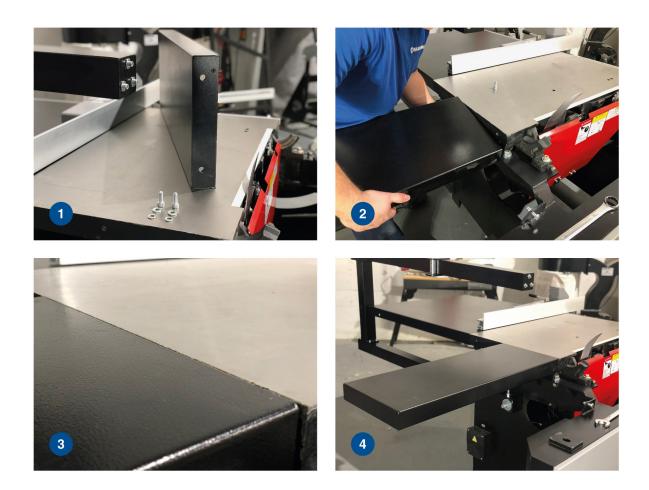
, 2 and 3: Align side table with main body of the machine. Make sure it stays flush. Fig. 4: Tighten two allen bolts.
